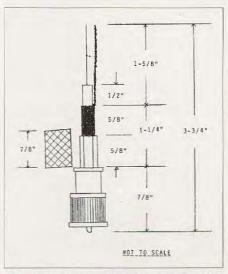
Coax assembly measurements. Use a soldering iron to melt the insulating material. Do not pull. (Drawing not to scale.)
